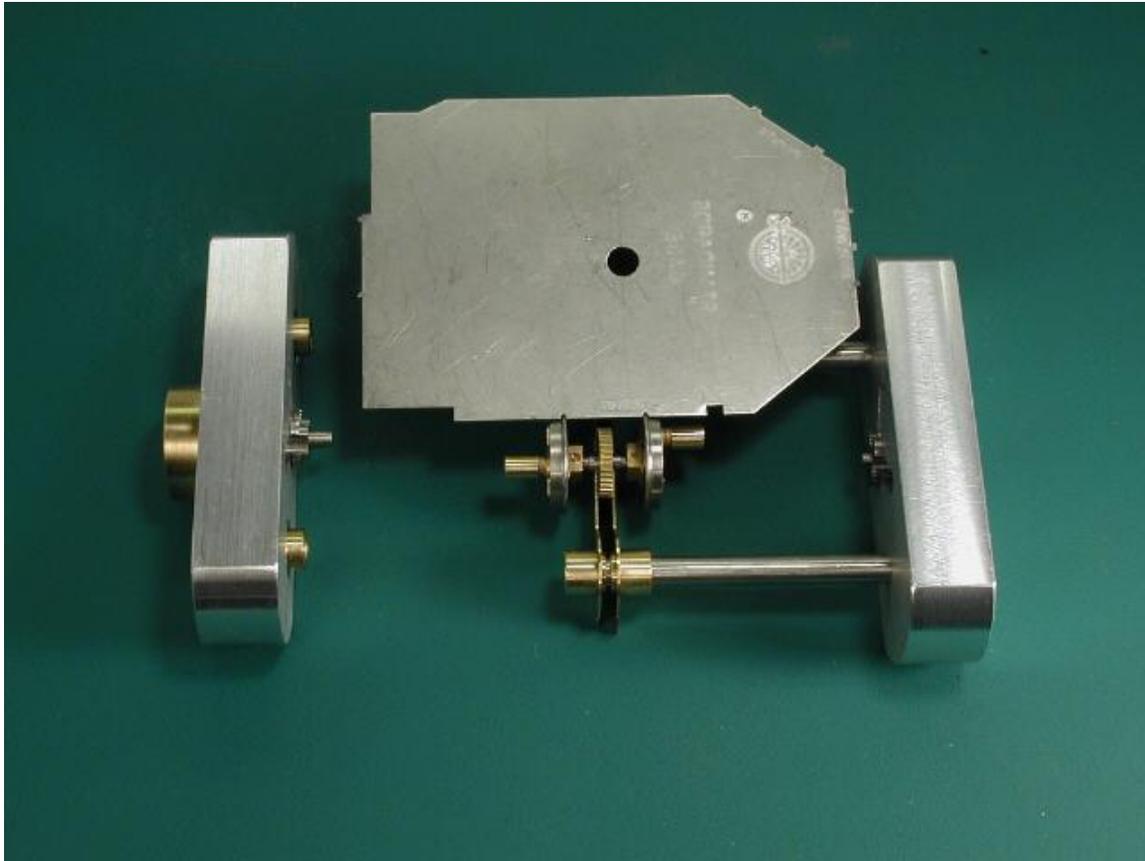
The Quarterer has been opened up and the gauge of the wheels is checked. It may be necessary to “tweak” the drivers slightly, by using either the NWSL Puller and/or the NWSL Sensipress to ensure perfect gauge. Just remember to work carefully, so as to keep the fit tight.
